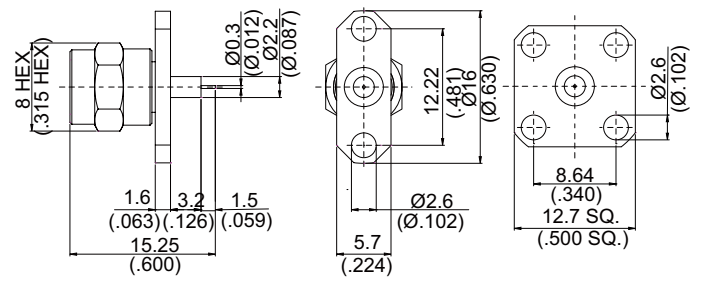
2-hole flange Fig. 4-2:square flange
